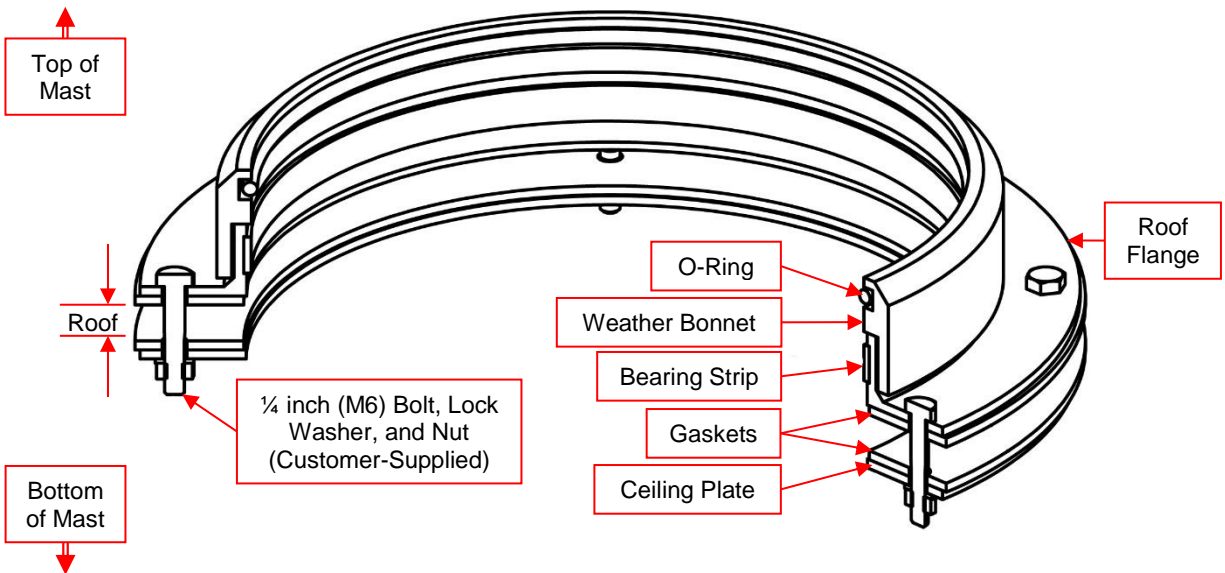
Internal Mounting Kit for Standard-Duty and Heavy-Duty Masts (P/N: 905733 Shown)
